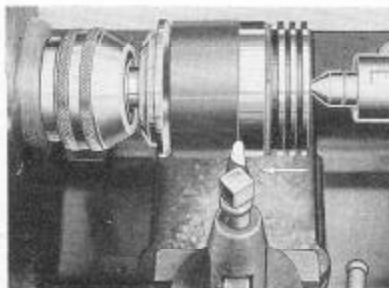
Finishing a Semi-Machined Cast Iron Piston Mounted on the Piston Adapter
